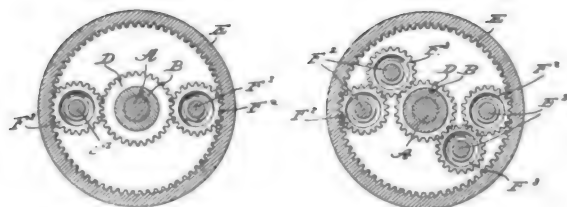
BELDING'S ELECTRIC CAR GEAR.
